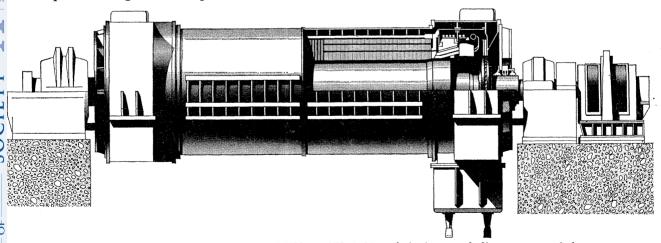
Four-pole generator 1333 MVA, 26 kV, 1800 rev/min (stator winding: water cooled, rotor winding: hydrogen cooled).
